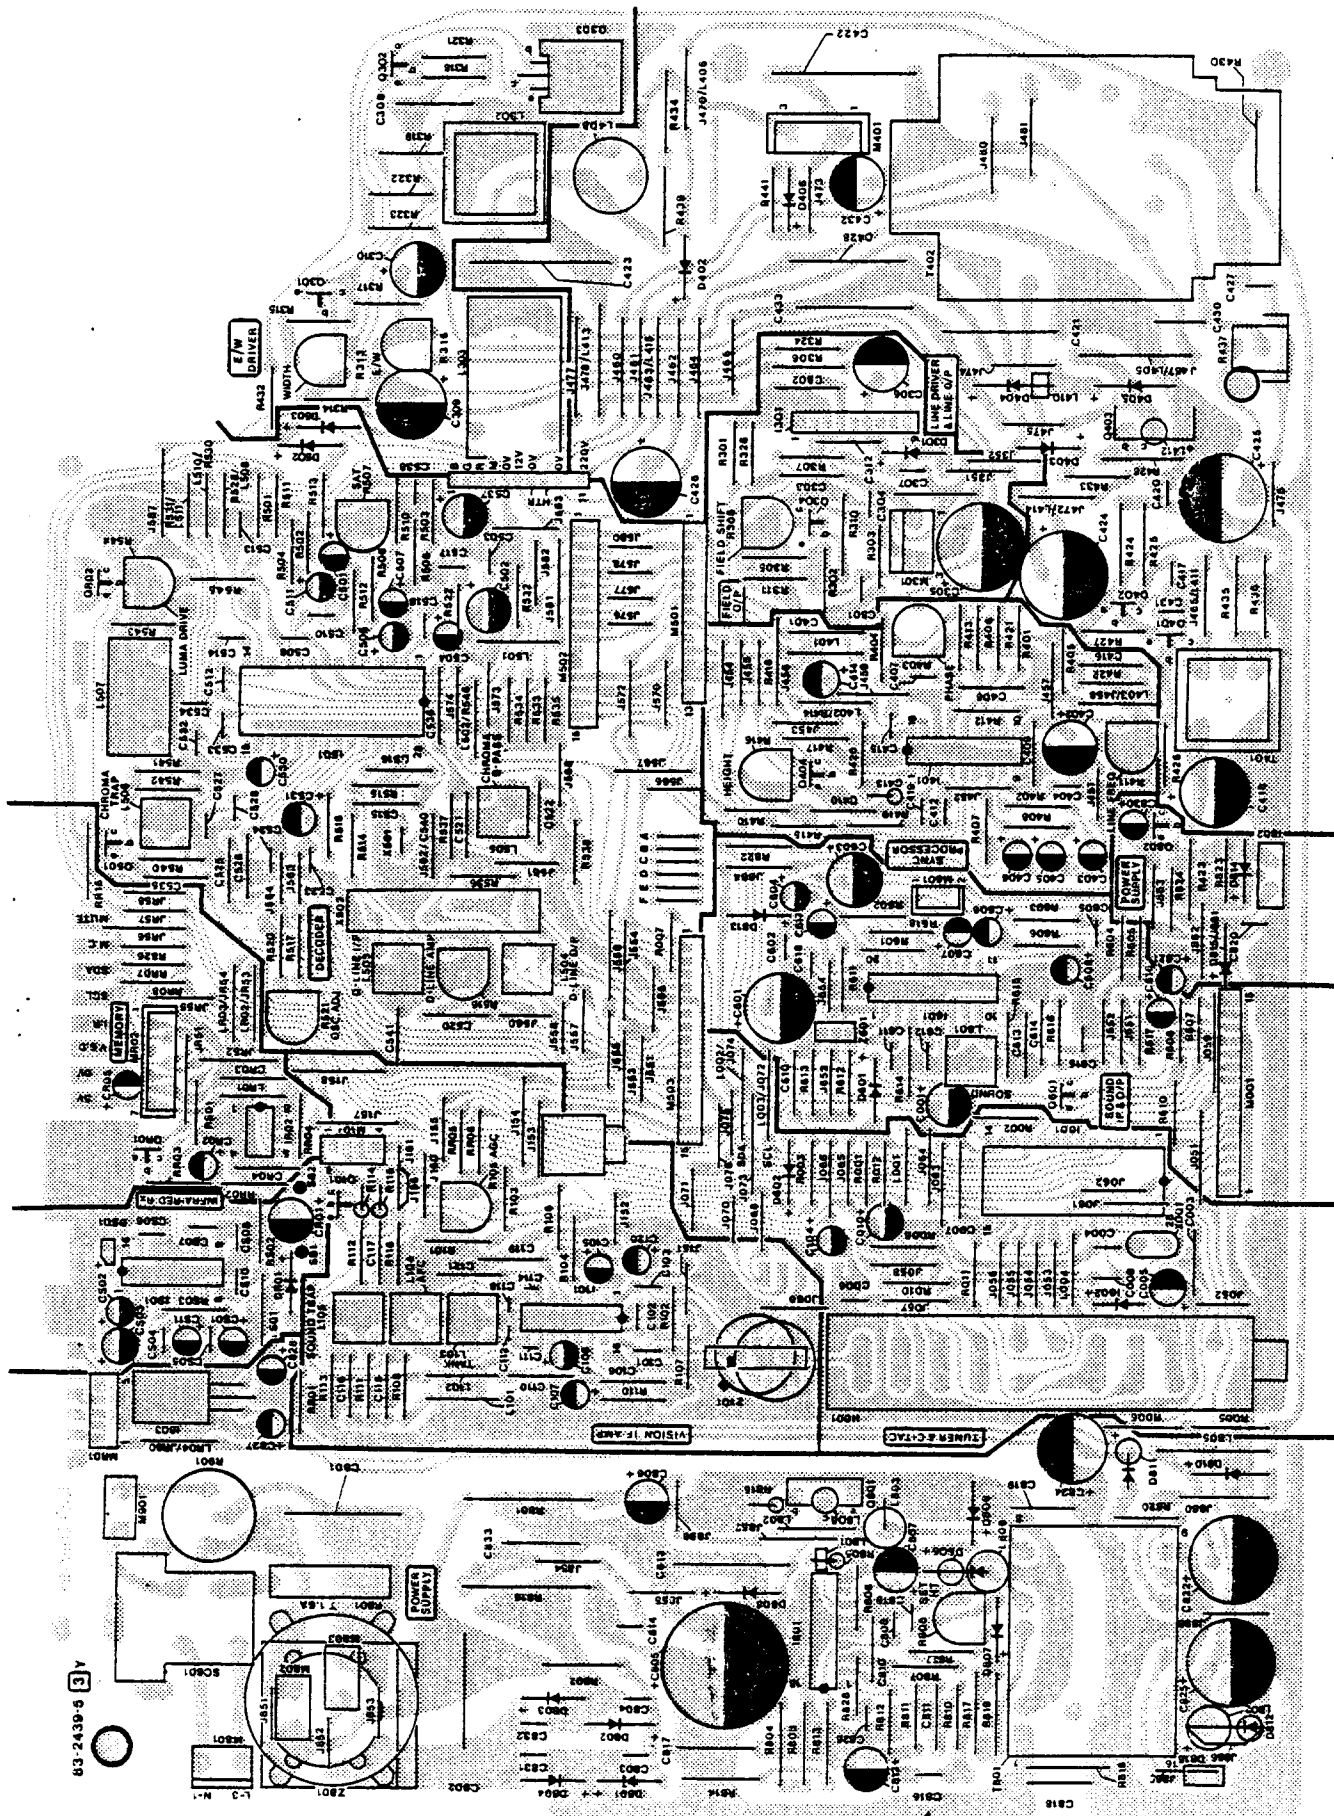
(b) 180 Series Main Chassis p.w.b. - component side.
